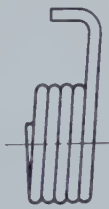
The end of the arm of this spring is bent parallel to the spring axis and in, toward the body. This may be more difficult to make than the type end shown in Fig. 4.
